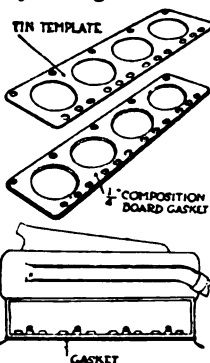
Tin template, and finished gasket. Lower cut shows gasket in position.
